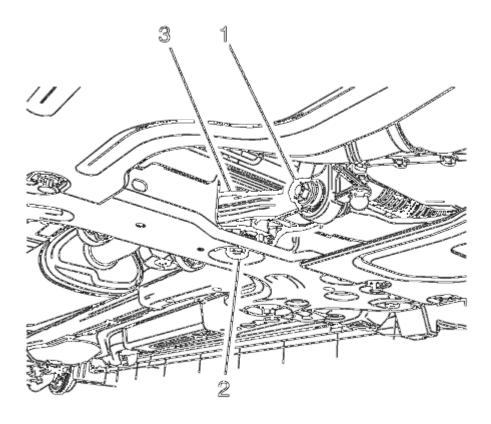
Booster Vacuum Pipe Courtesy of GENERAL MOTORS COMPANY
